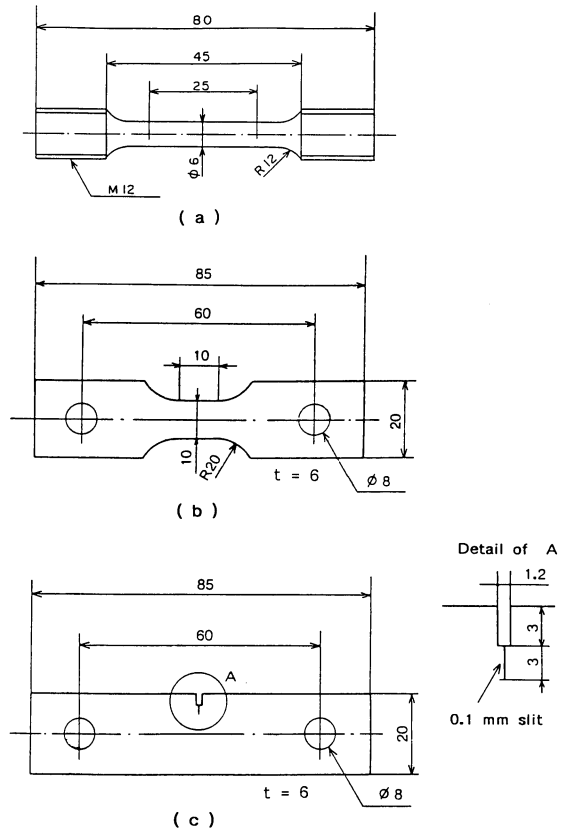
Specimen geometry and dimensions. (a) Tensile test specimen. (b) Fatigue test specimen. (c) Fatigue crack growth test specimen.
